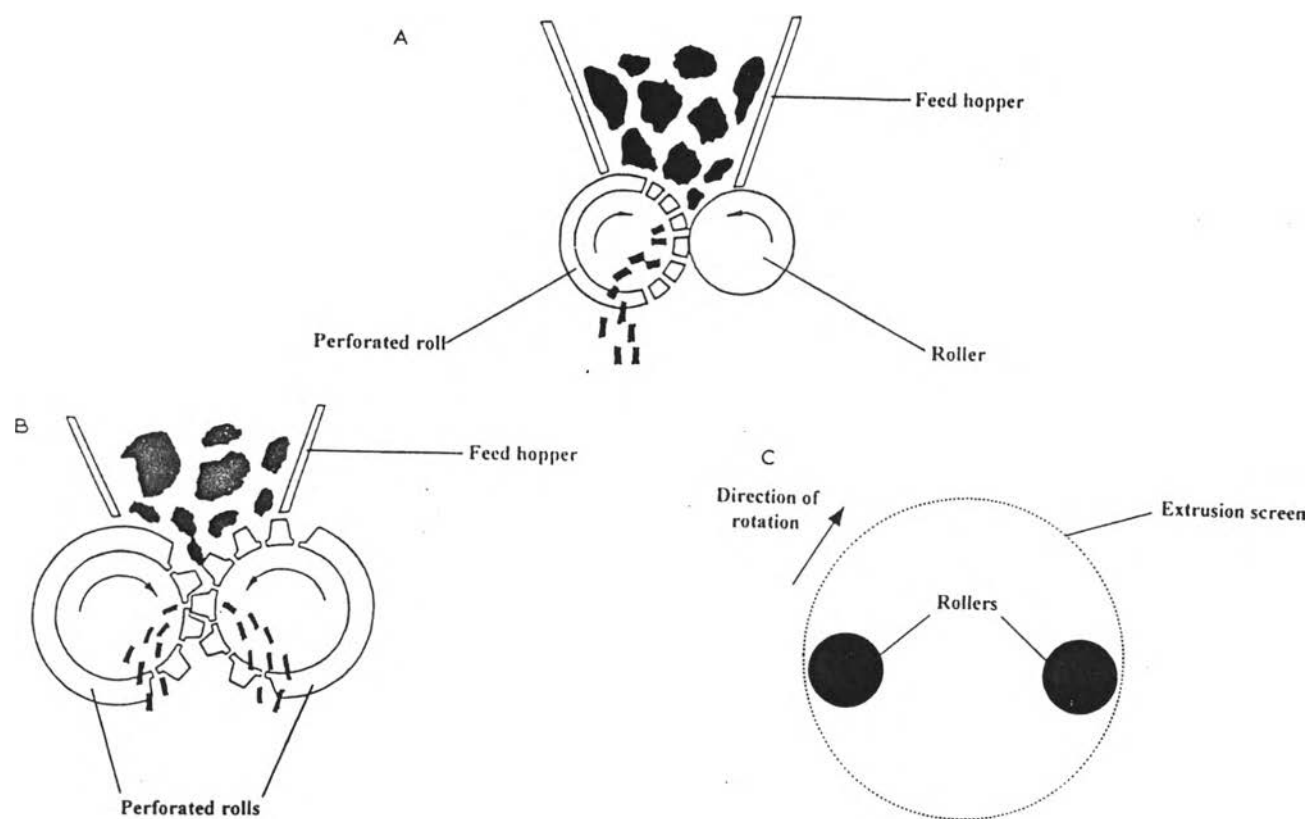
Schematic of roll extruders. (A) with one perforated roll , (B) with two perforated rolls , (C) with the extrusion screen rotating around rollers.
